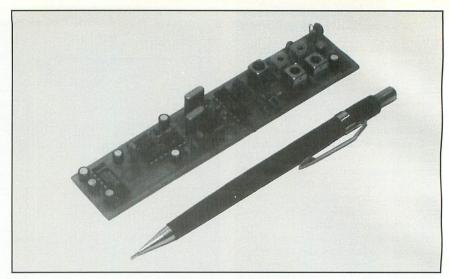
Photo of completely wired transmitter circuit-board assembly.
